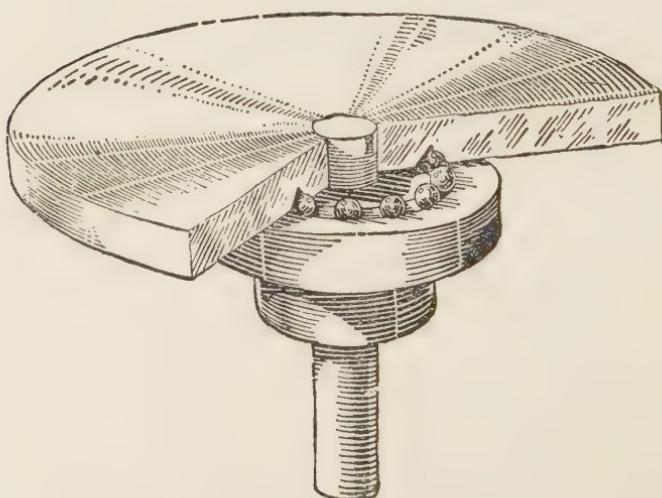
BALL BEARING FOR SURFACING MACHINE
